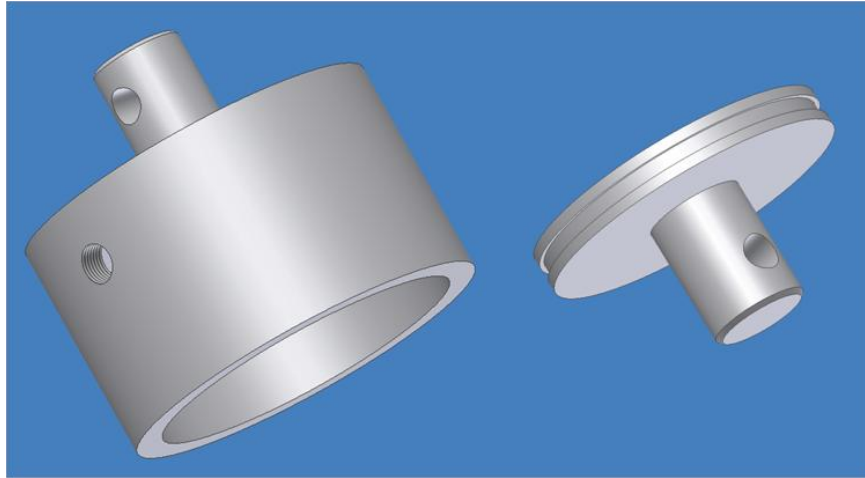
Sections of the piston used in the dynamic mechanical loading tests.
